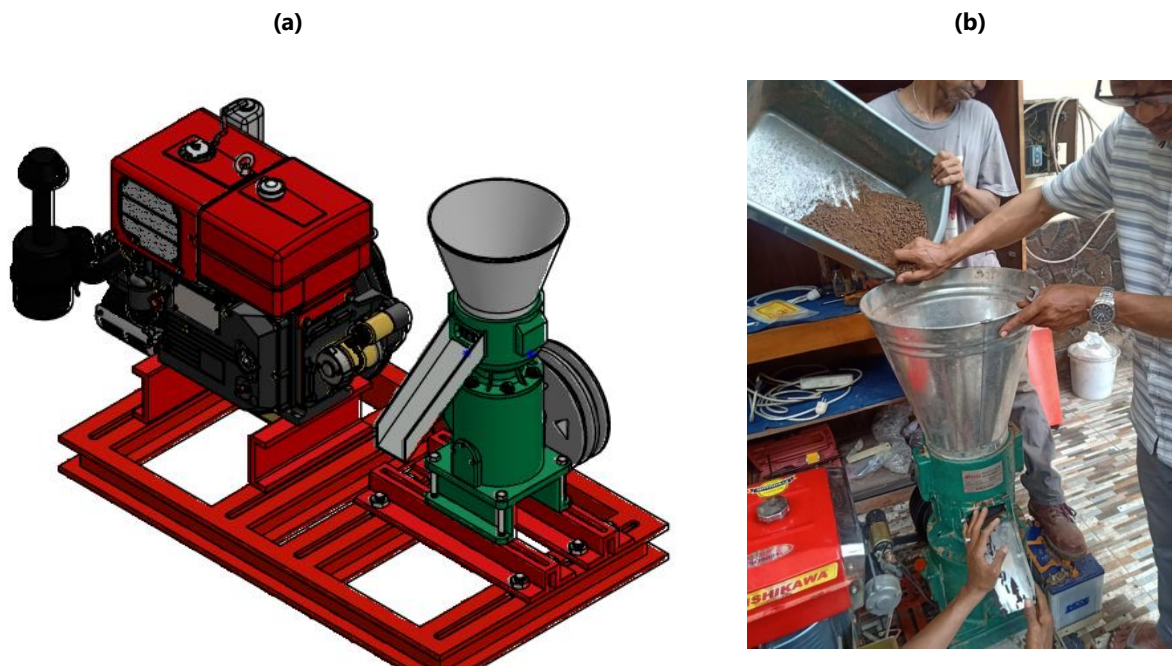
Pelletizer Machine, (a) as a 3D drawing ; (b) actual pelletizer machine.
